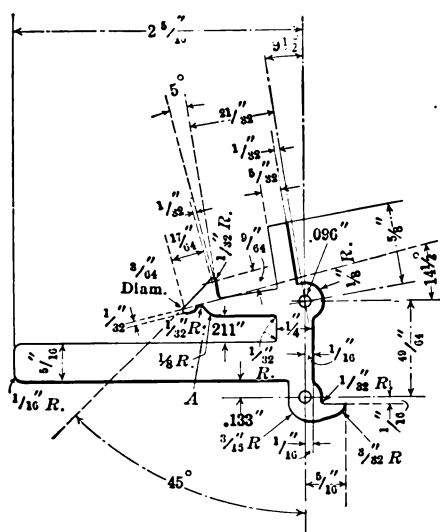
Detail of blank produced in the tools in Fig. 104
